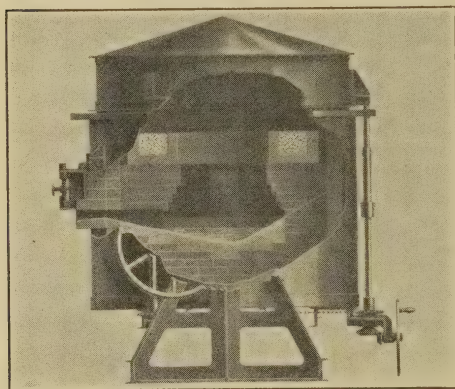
Cross-section of a Baily electric furnace showing trough forming the resistor element, hearth, and pouring spout.
